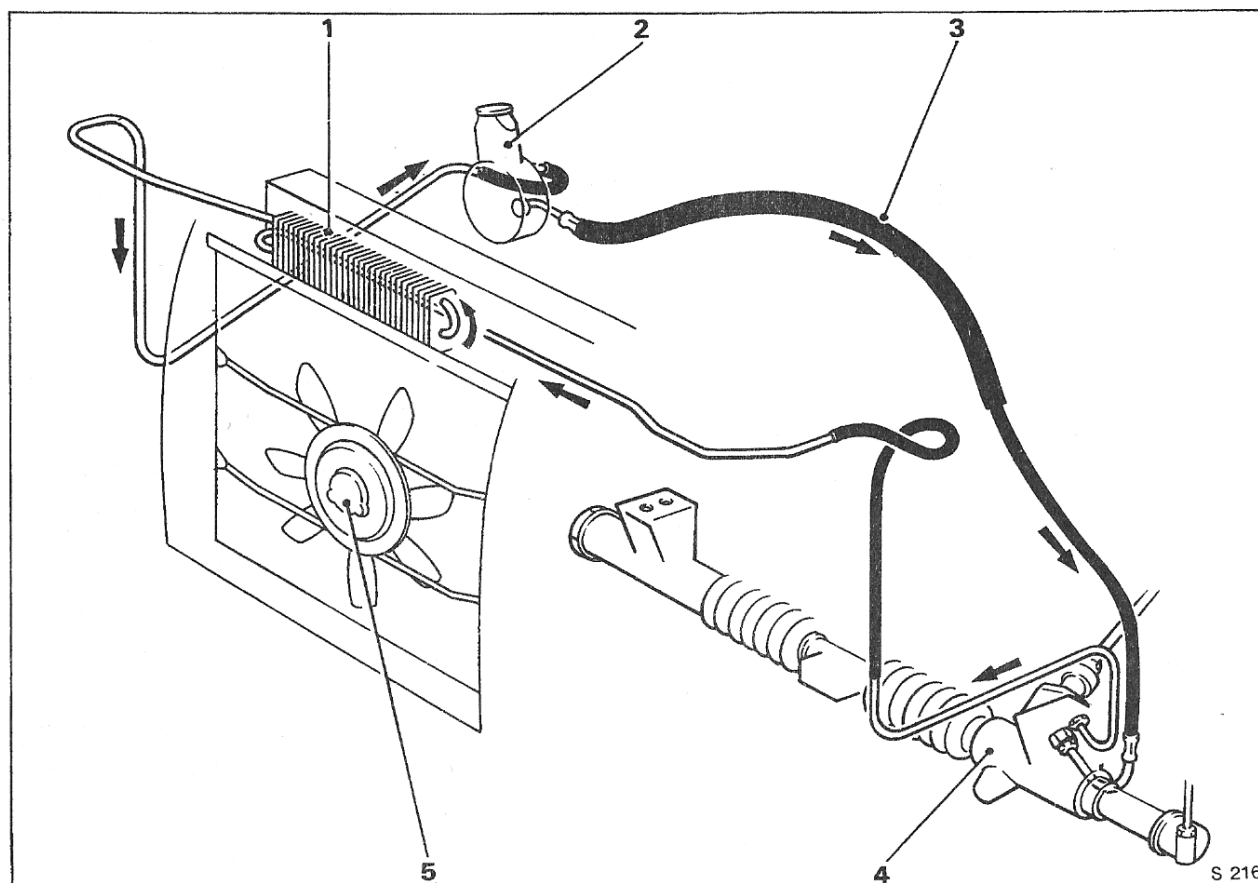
Hydraulic pipe runs. Left-hand drive car
